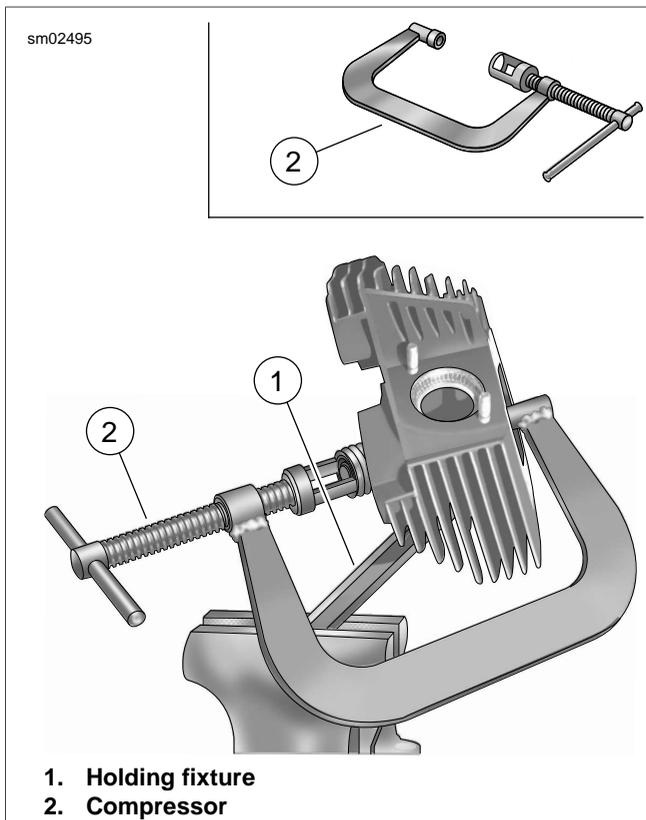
Valve Spring Compressor (Part No. HD-34736-B)
